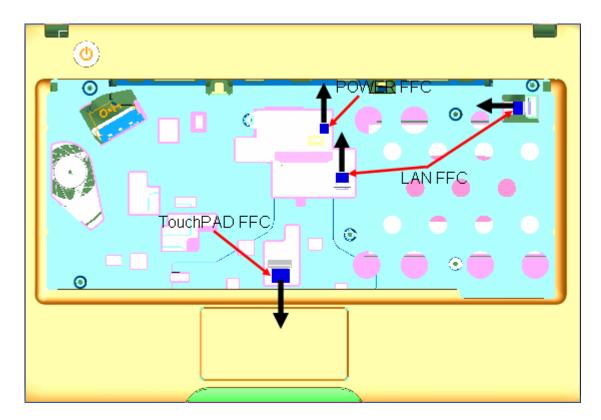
Disconnect the touch pad flat cable/LAN cable
